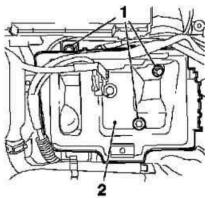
Support Battery: 1 - mounting screws, 2 - prop
